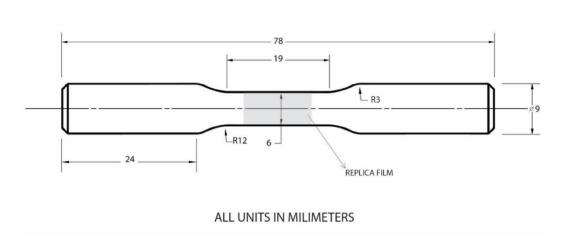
Sample geometries (all units in mm) for rotating bending fatigue tests and replica film on specimen surface.
